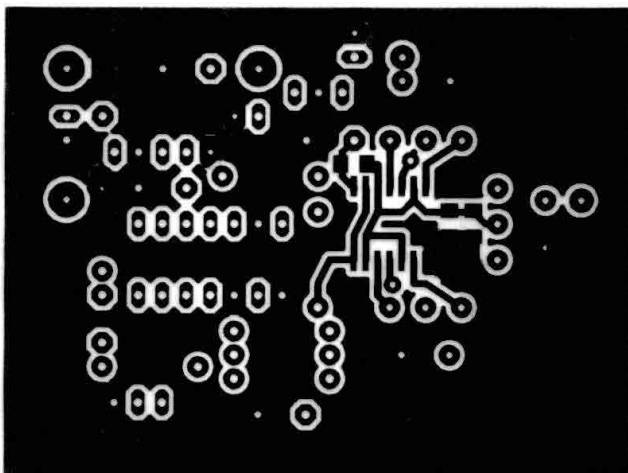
H-mode mixer PC board component-side etching pattern. The finished board should be 65x50 mm.
